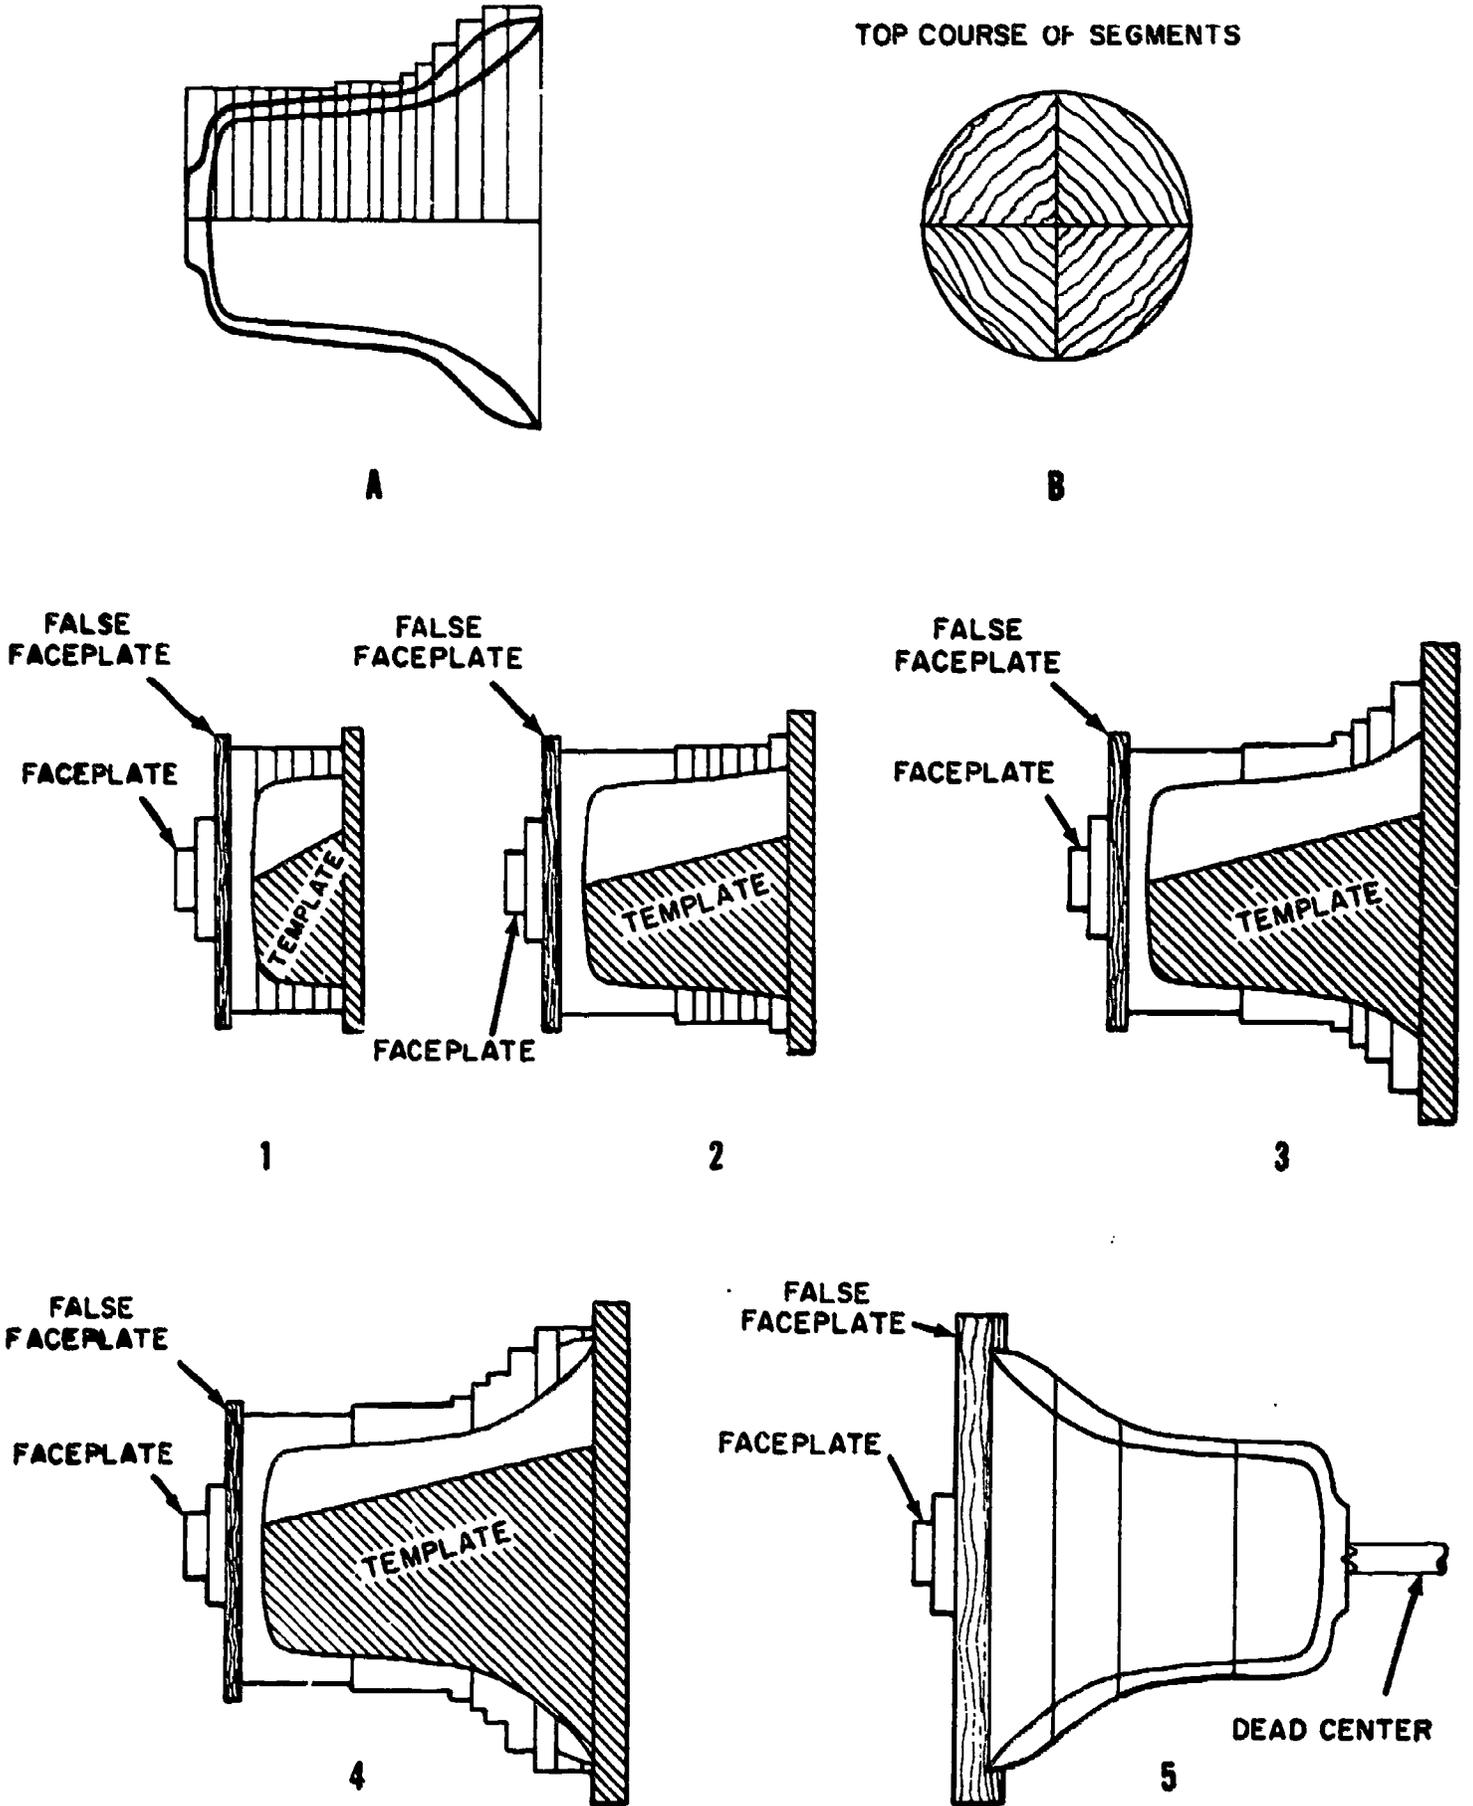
The layout of a bell-shaped pattern showing its construction features. 68.170
